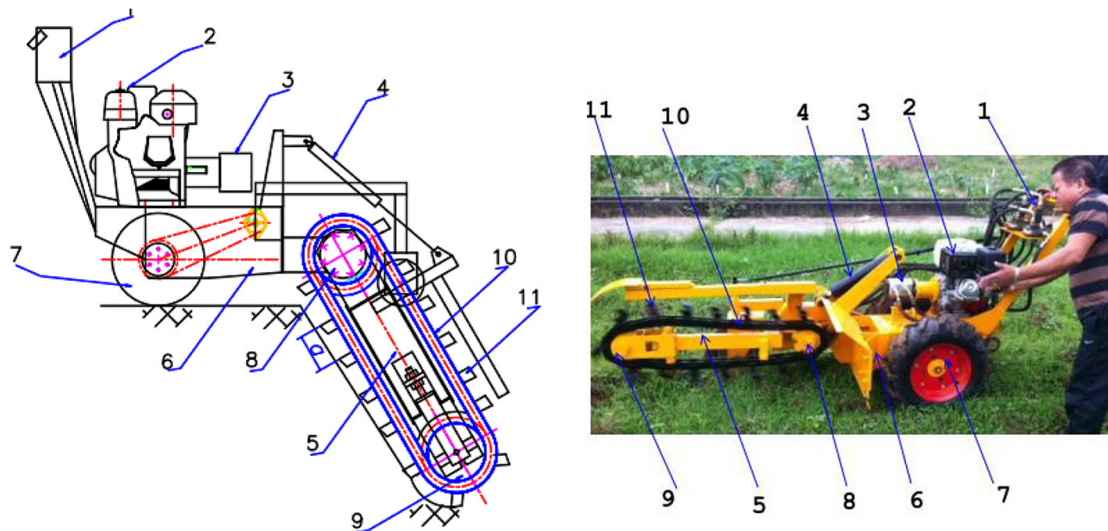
General structure of experimental machine [10]; (1) control distribution box, (2) internal combustion engine, (3) hydraulic pump, (4) cylinder lifting chain, (5) trench excavator chain bracket, (6) machine frame, oil tank, (7) moving mechanism, (8) active sprocket, (9) passive sprocket, (10) chain, (11) cutting blade
